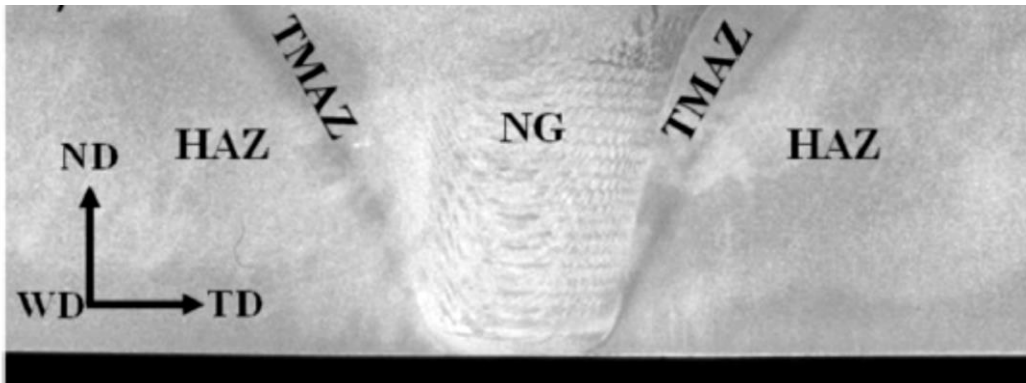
Different welded zones of friction stir weldments (Hamada et al. 2015)
